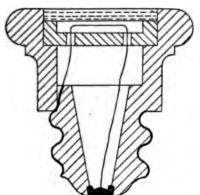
Cross section through plug fuse. With this type of fuse it is impossible to place any except the correct size of plug in the socket.
